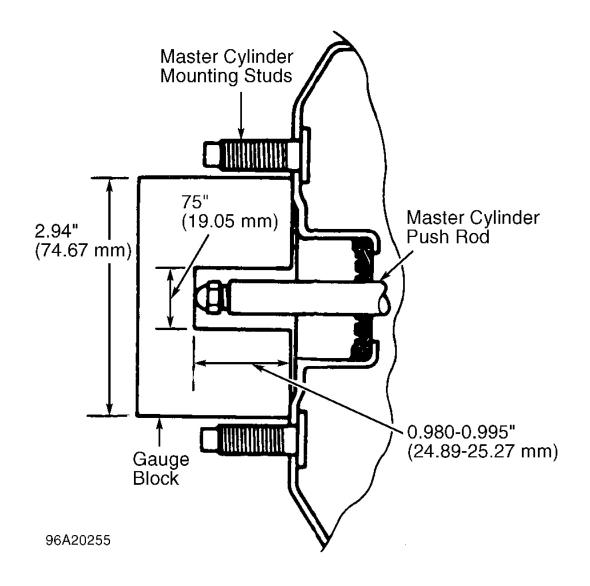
Adjusting Brake Booster Push Rod (B2300, B3000 & B4000) Courtesy of FORD MOTOR CO.
